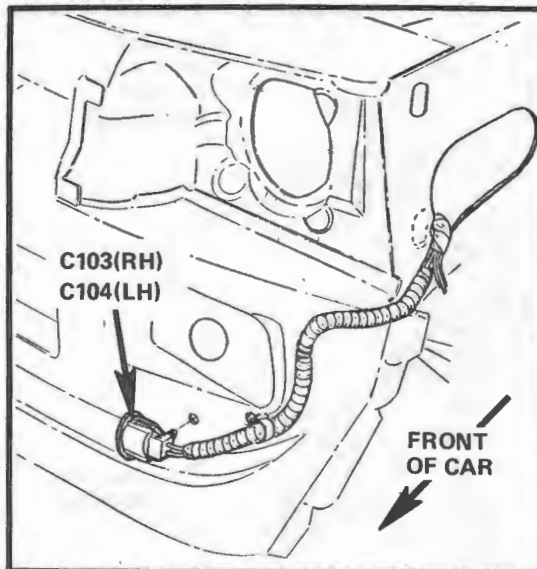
Behind LH Side of Front Bumper (RH Side Similar)
